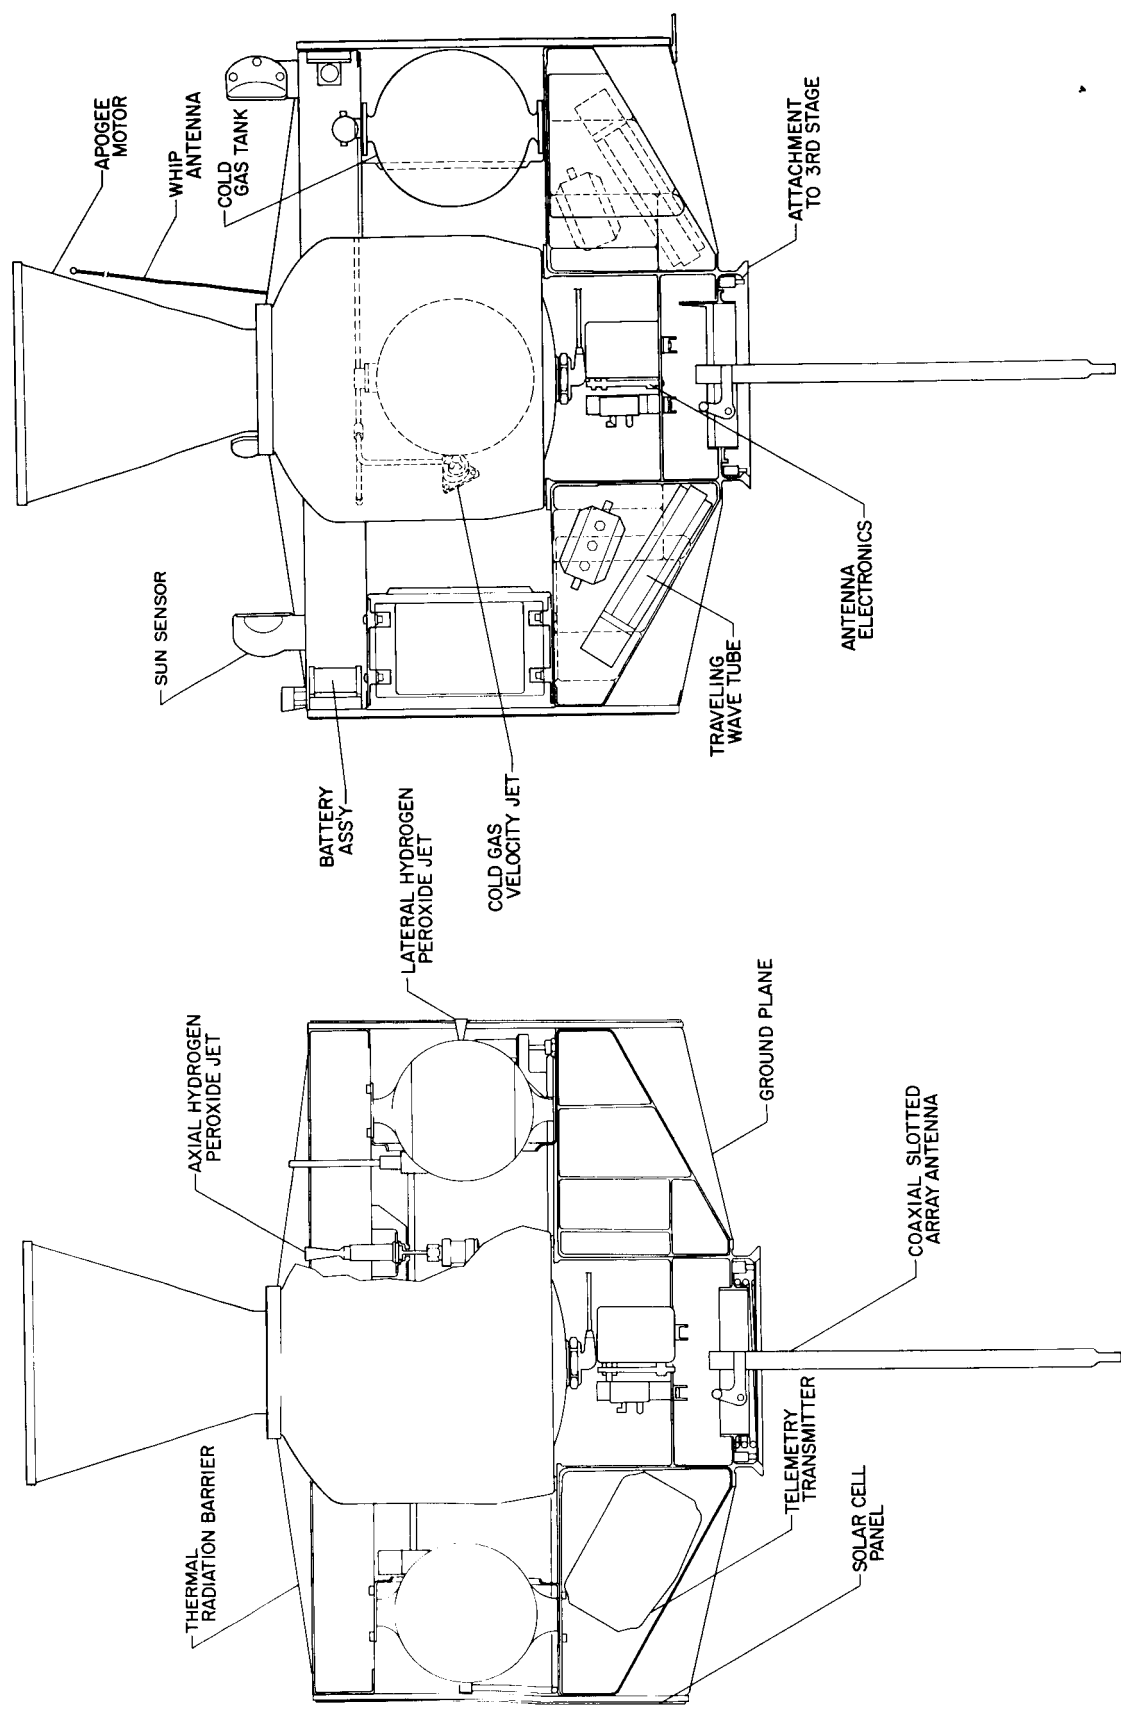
Layout of SYNCOM I spacecraft with JPL motor
